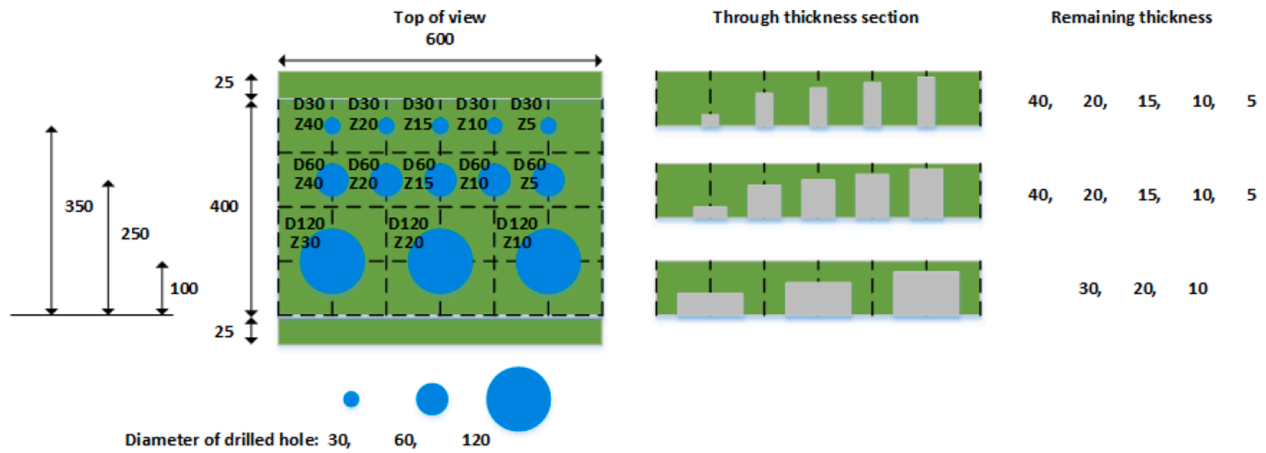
Diagram of the specimen with flat bottom holes. All dimentions are in mm.
